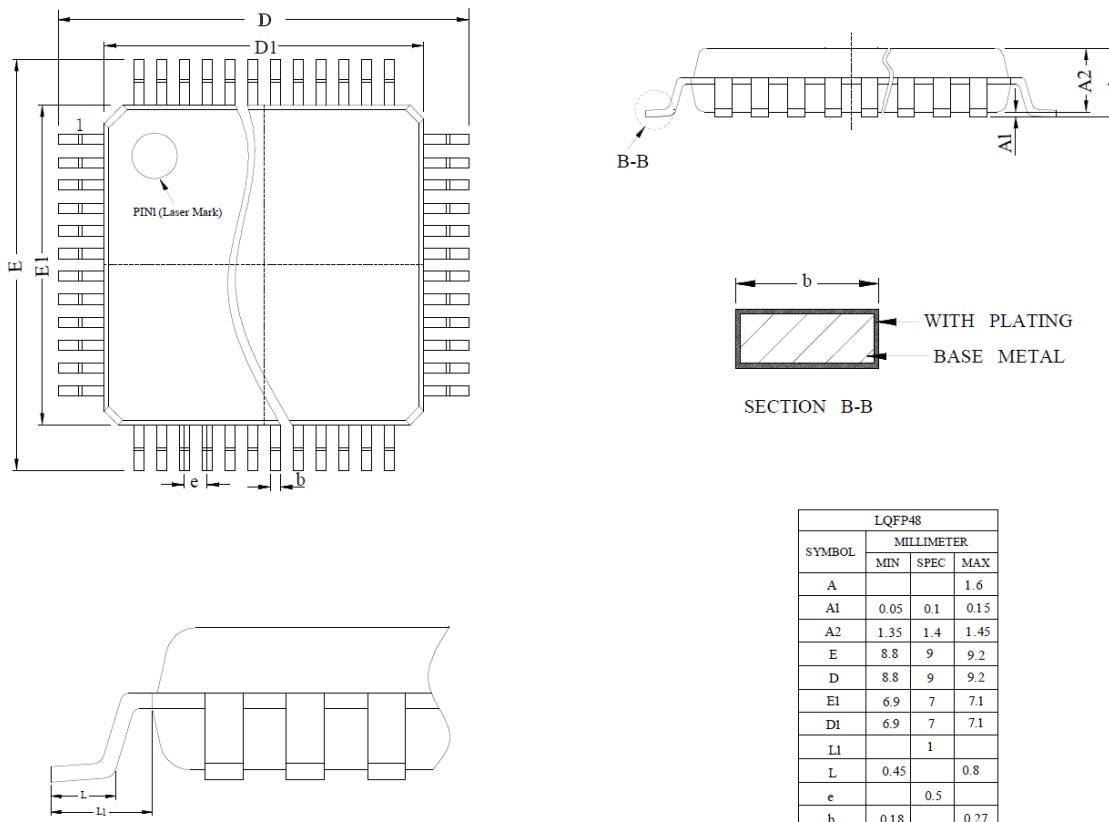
LQFP48\_7X7 Package Drawings and Dimensions
